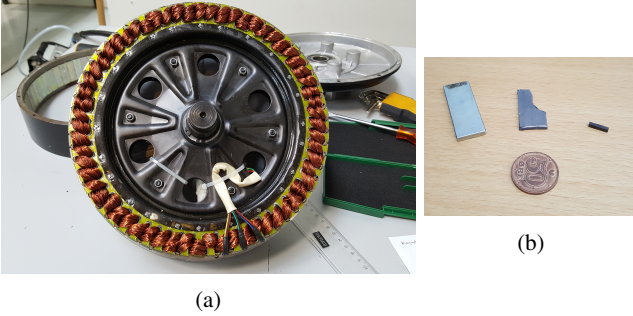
(a) Disassembly process, (b) Magnet samples.
